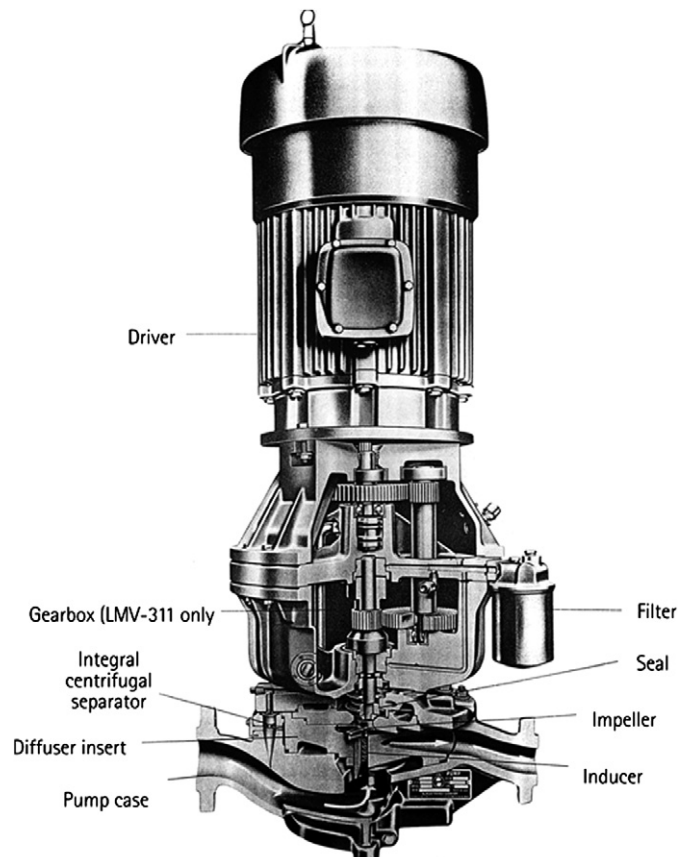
• Integral gear centrifugal pump (Courtesy of Sunstrand Corp.)
